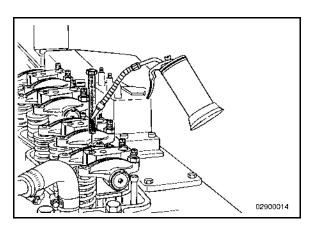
LUBRICATE THE 8 MM PEDESTAL CAPSCREW THREADS AND UNDER THE CAPSCREW HEADS
